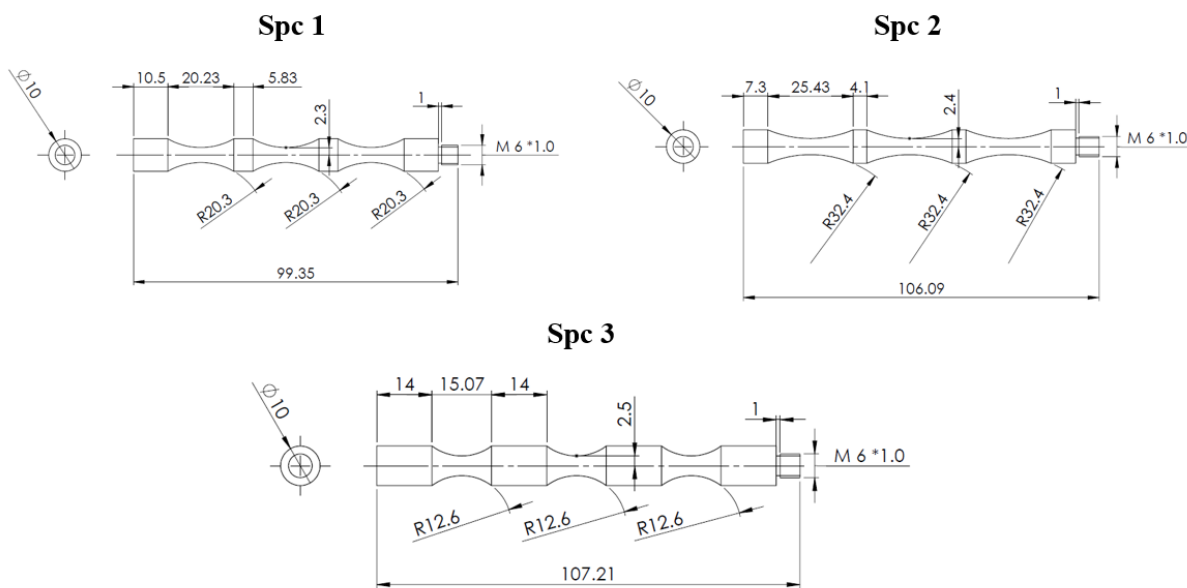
Chosen and machine Tension-Torsion new specimens (Spcx).
